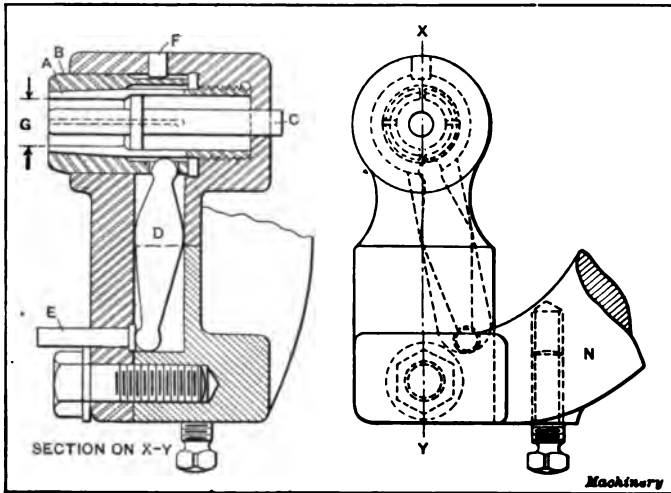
Standard Work-holder used in Connection with the Burring Attachment
